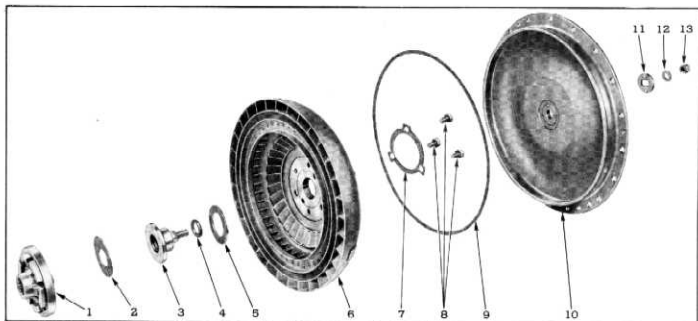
Layout of Turbine Parts to Transmission KT-22574A-15-D
